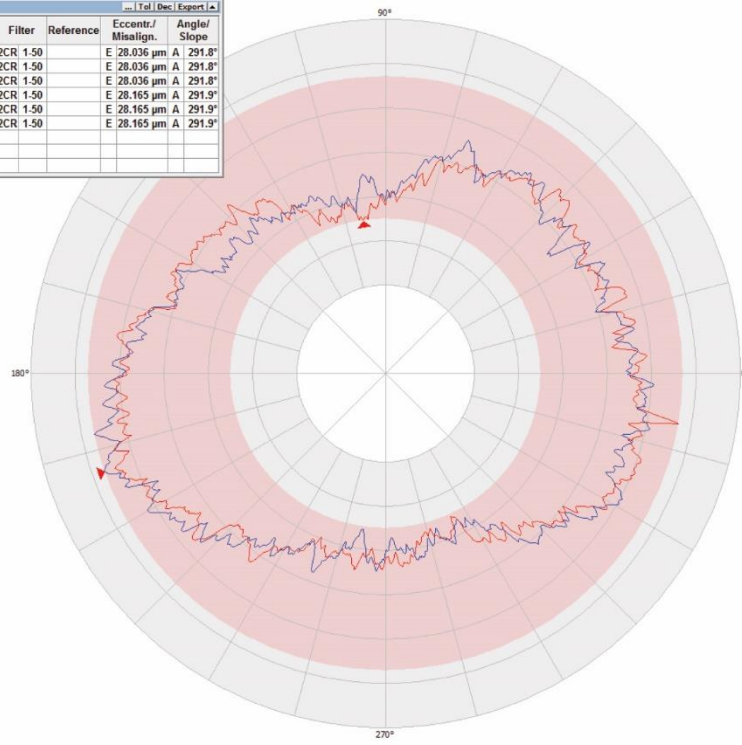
Roundness of Bore with Welded Flanges – Measurement 1
